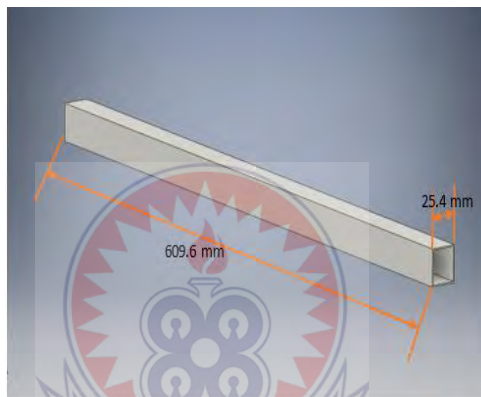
Geometric of straight shape Specimen 'S2' at a load of 9.1KN
